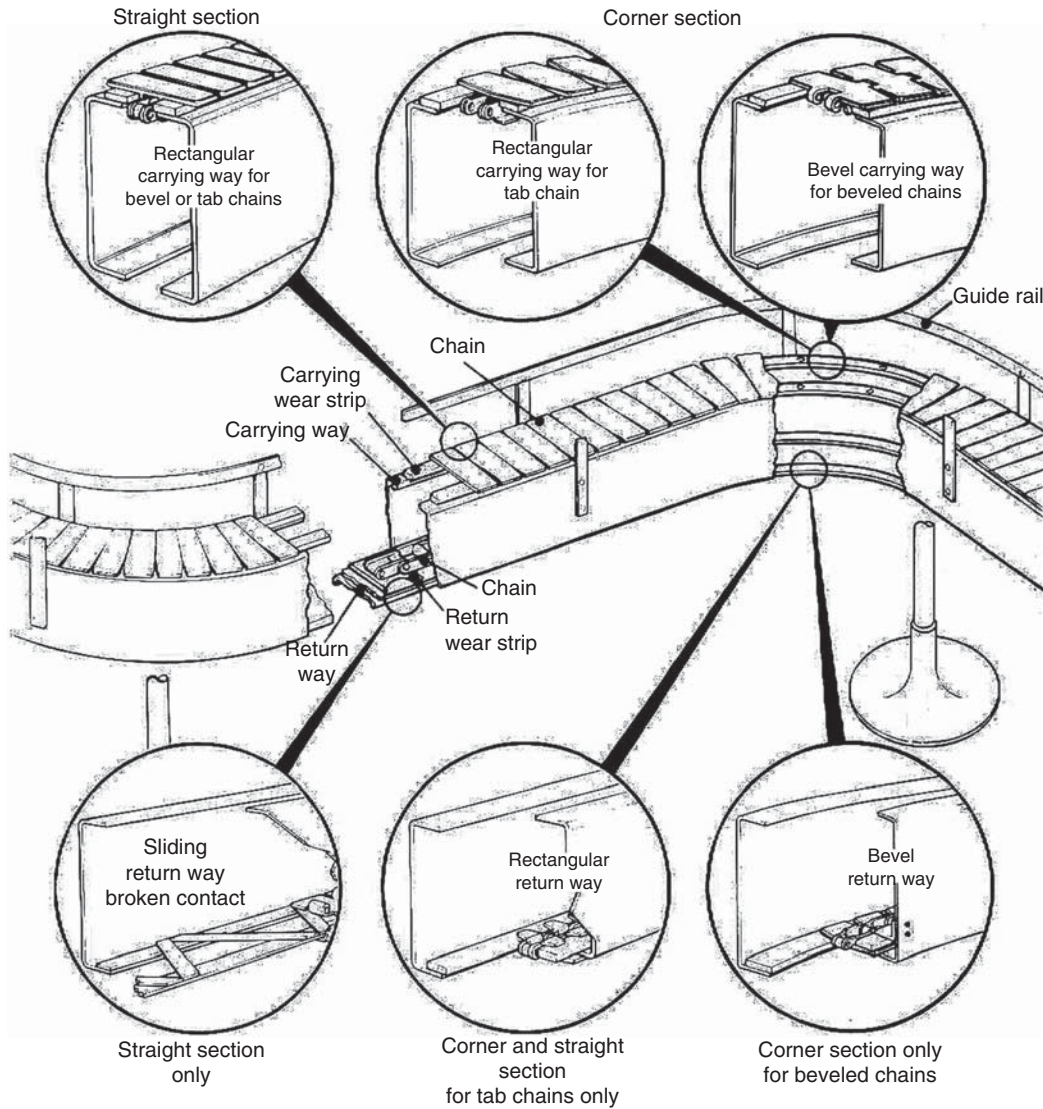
Typical Side-Flexing Slat-Top-Type Conveyor design.
